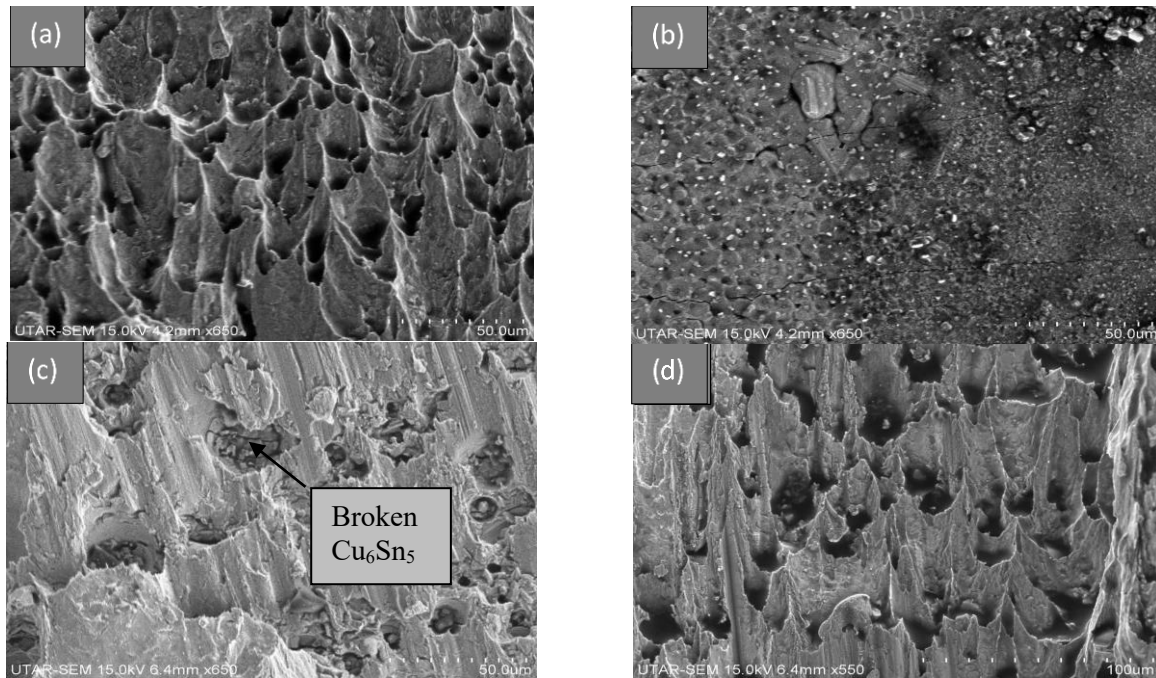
Fracture surface of SAC305-xPt/Cu solder joint: (a) as-reflowed; (b) 0 wt.%; (c) 0.10 wt.%; (d) 0.30 wt.% after thermal aging at 150 °C for 1000 h.
